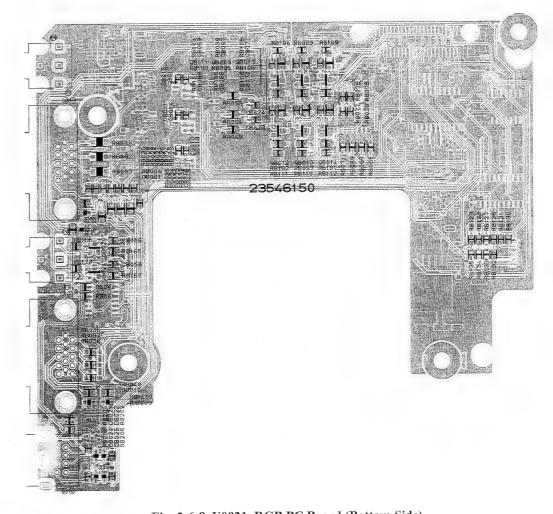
U0021 RGB PC Board (Bottom Side)
